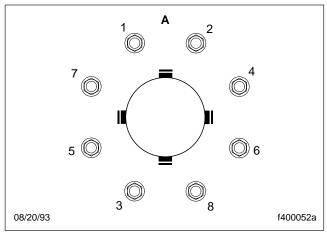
, Tightening Pattern, 8-Hole Wheels
